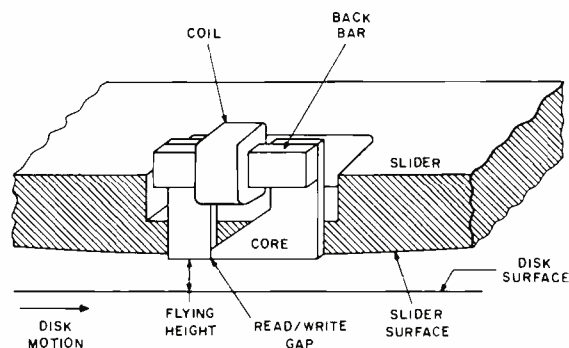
Cutaway view of slider showing head configuration (flying height not shown to scale).
